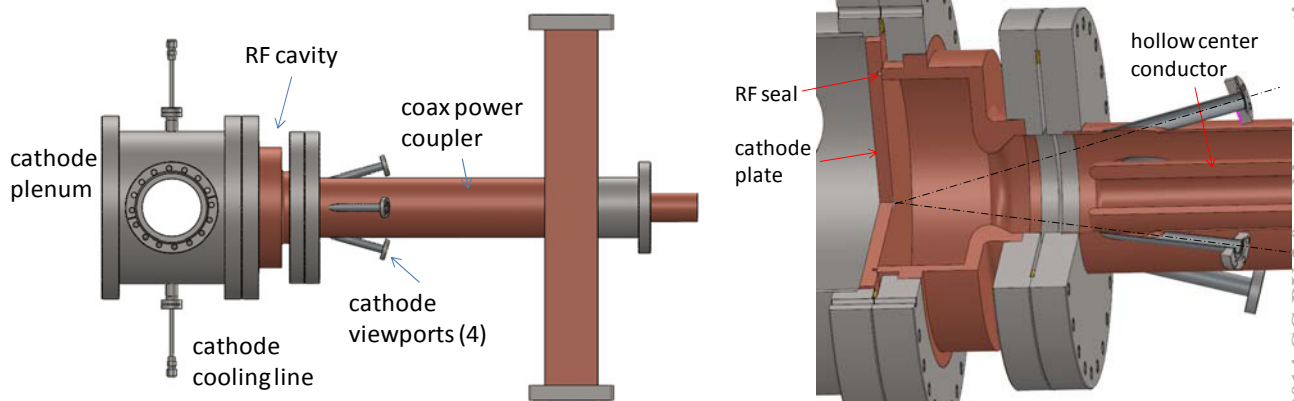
Mechanical design of the MaRIE cathode test cell: overall view (left) and closeup cut-away view (right).
